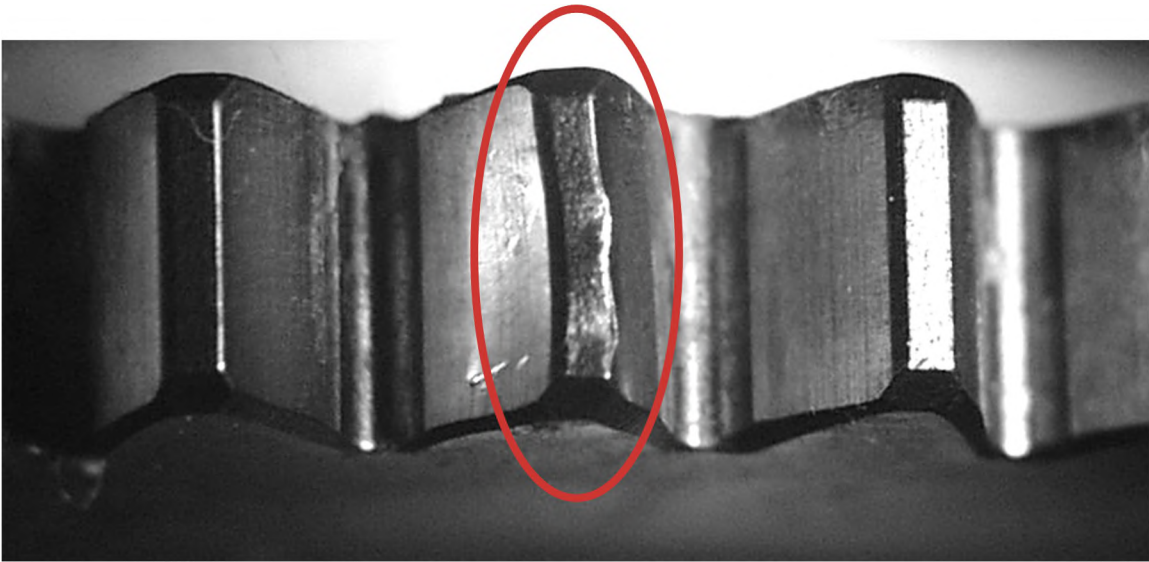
Severely deformed gear tooth as result of engagement with largest chip tested, chip #7 having mass of 0.342 grams. The gears can no longer be rotated to engage and pass through this tooth using hand torque.
